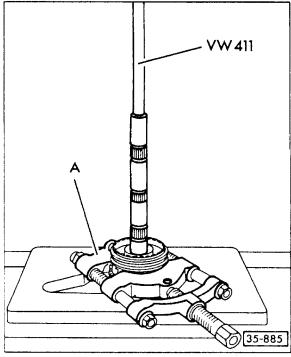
Synchronizer and 2nd gear, removing A—US 1103
